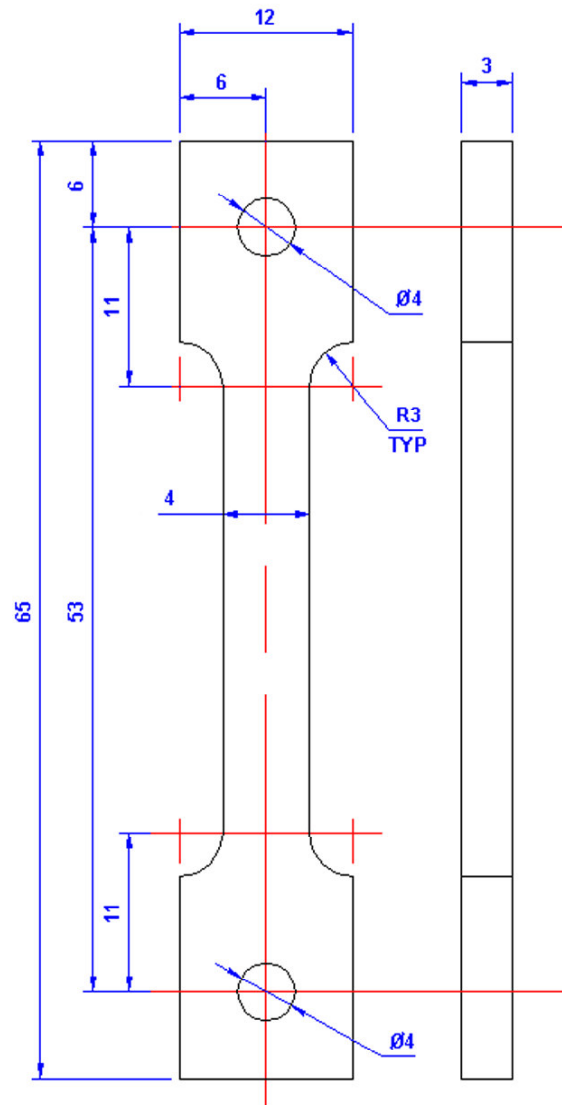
Final dimensions for the miniature ASTM E-139 specimen
